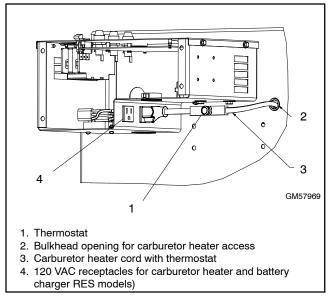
18RES Carburetor Heater Location (air intake side of generator set)
